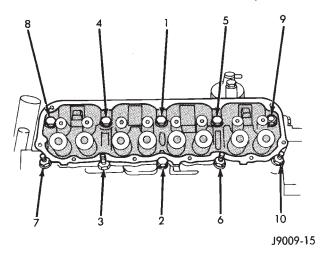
Engine cylinder head Bolt Tightening Sequence
